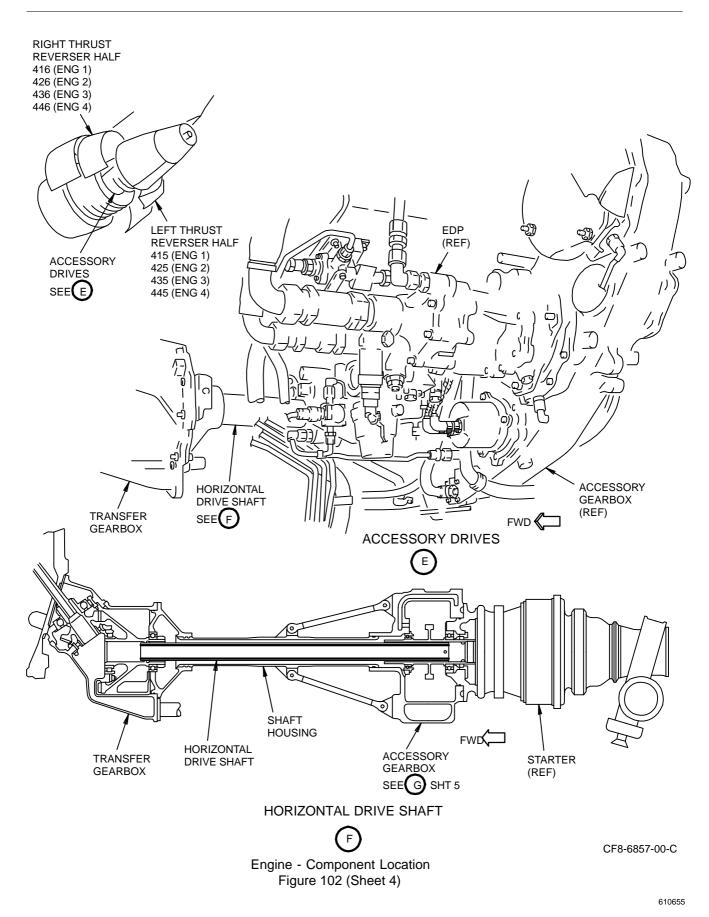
72-00 Engine Component Location Fig. 102 (Sheet 4)
